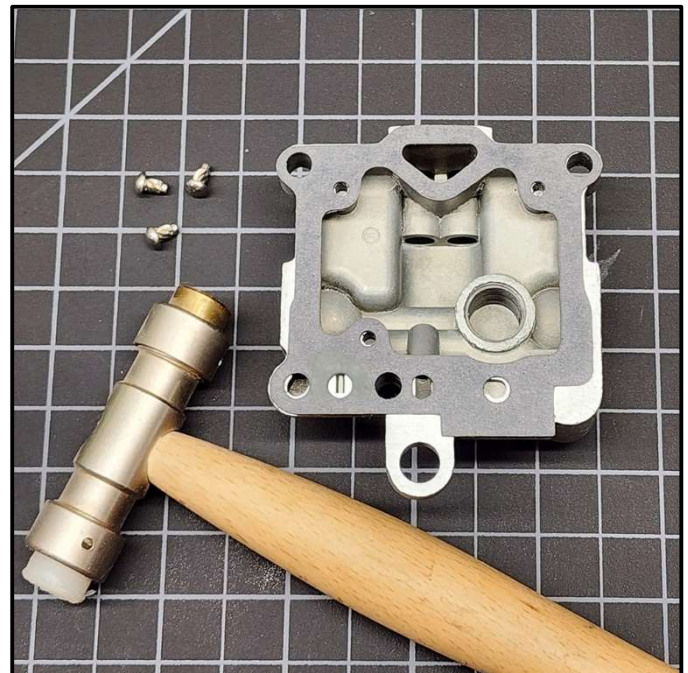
The gasket is placed onto the float chamber cover. Pictured along with it are the 3 hammer drive screws and the jeweller's hammer that will be used to drive the screws into place.
